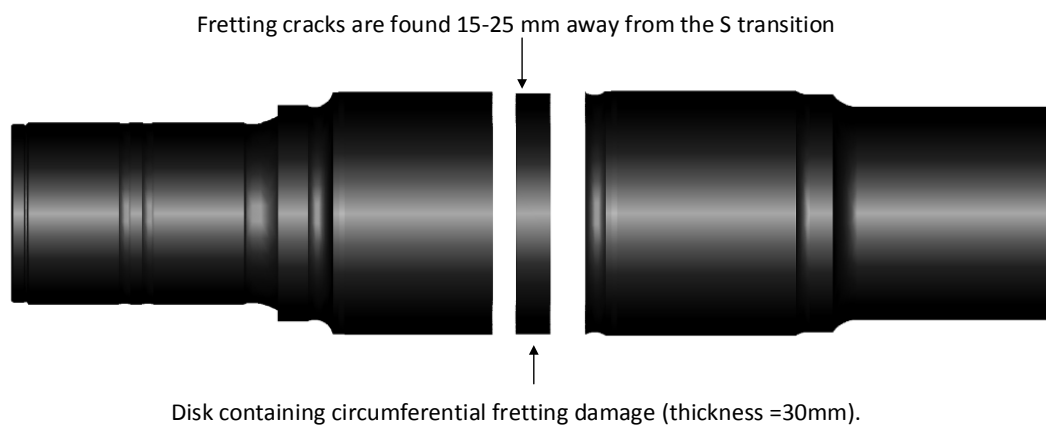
Location of typical fretting cracks on the axle.
